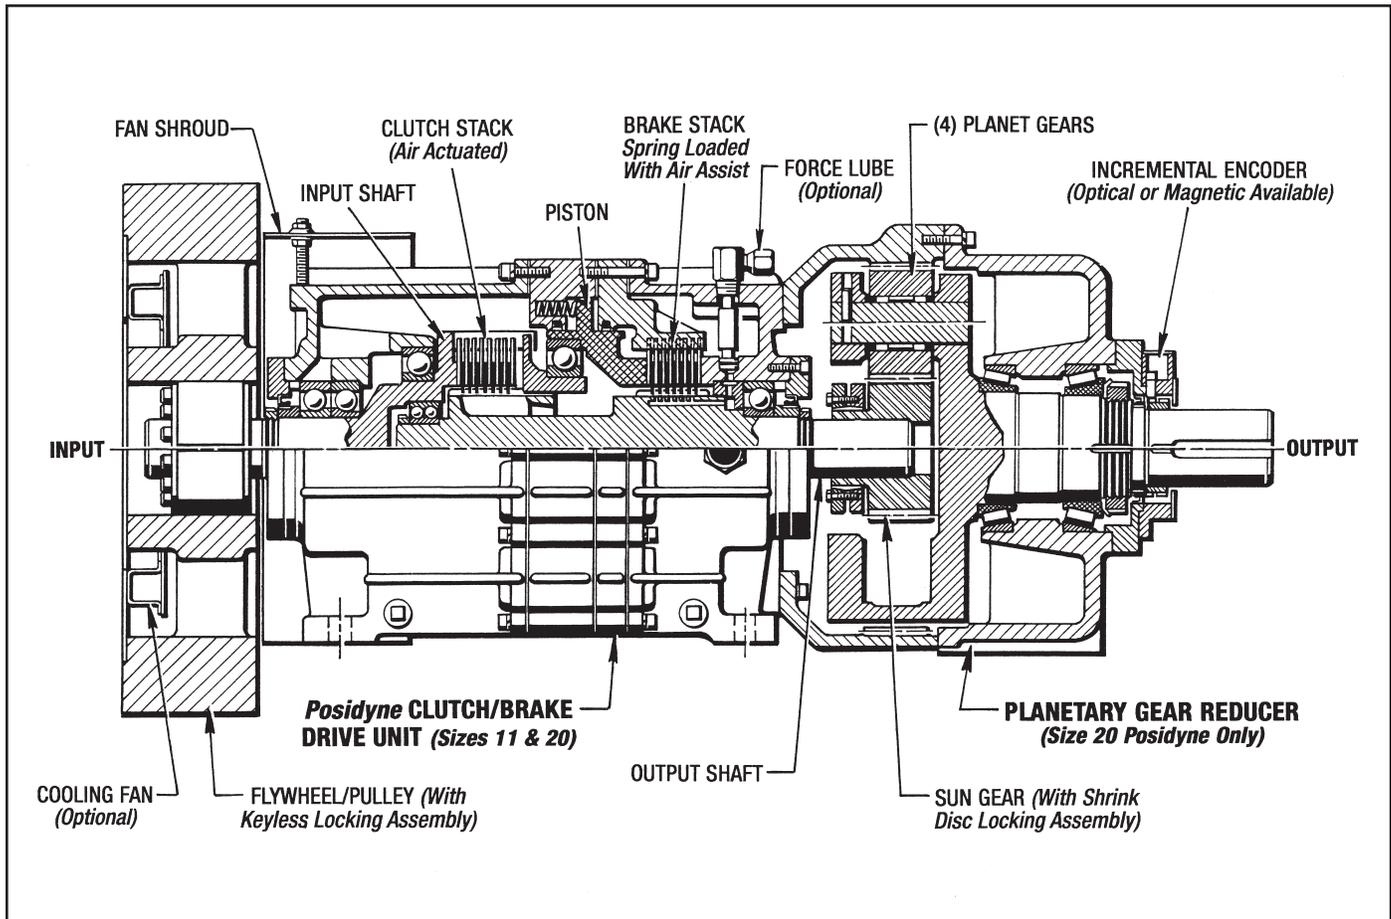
Posidyne Indexing Clutch/Brake Drive
